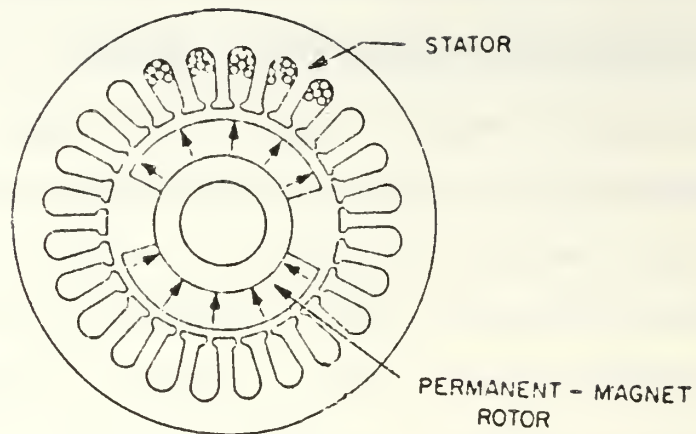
Cut-Away View of Brushless DC Motor Assembly.
